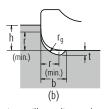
2 Chamfer Dimensions, Fillet Radius, and Shoulder Height
